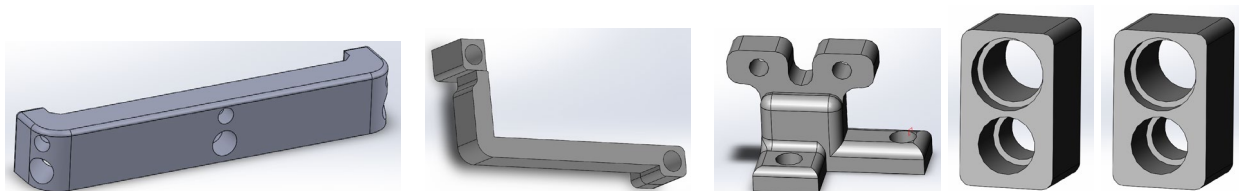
Front IR sensor holder, CPLD holder and rear sensor holder and IR Goggles X2.
